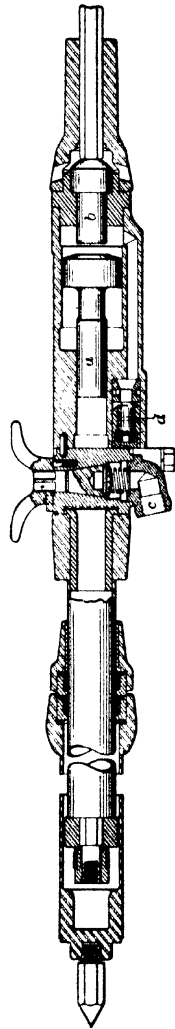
Ingersoll-Rand "CC Stopehamer" (Dry Type).
